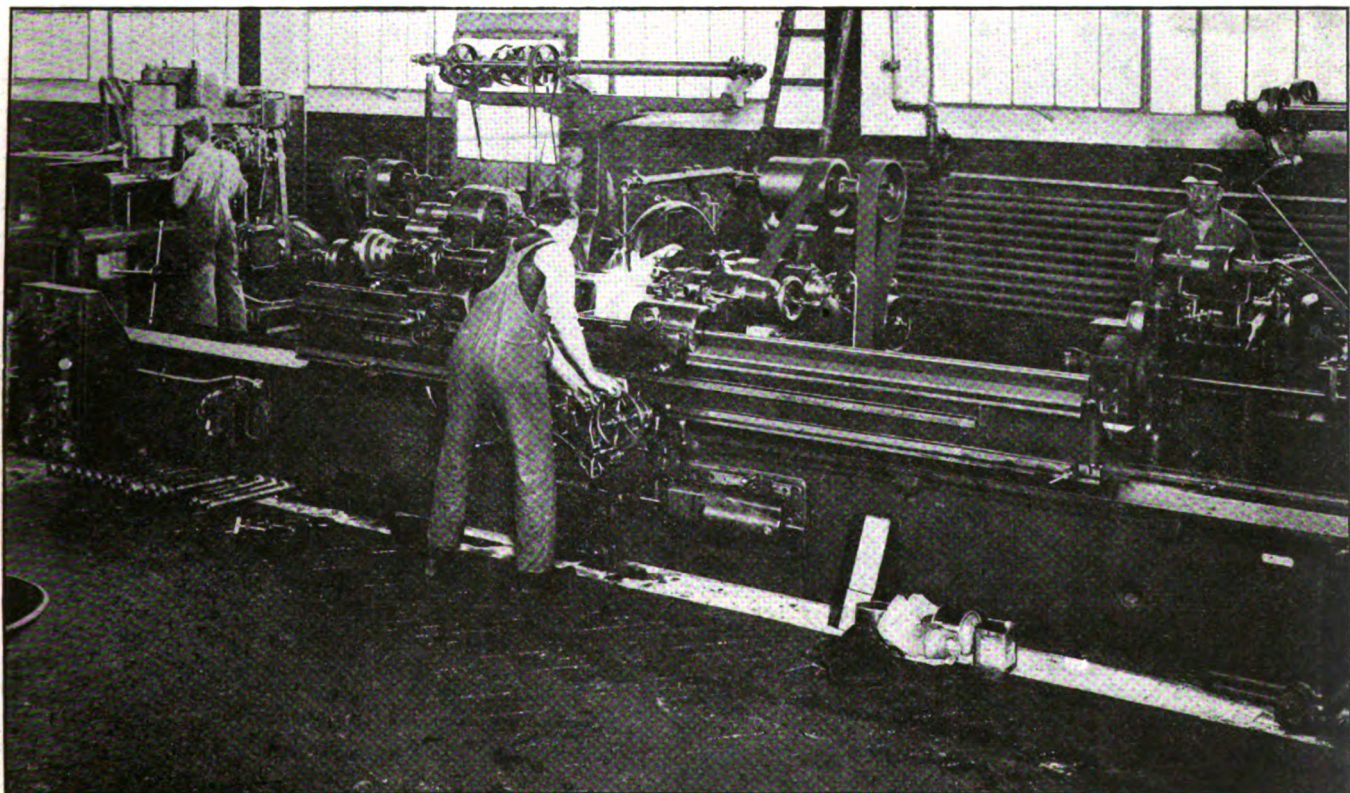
LARGE PLAIN GRINDING MACHINES ARE USED FOR ACCURATELY FINISHING CYLINDRICAL PARTS
